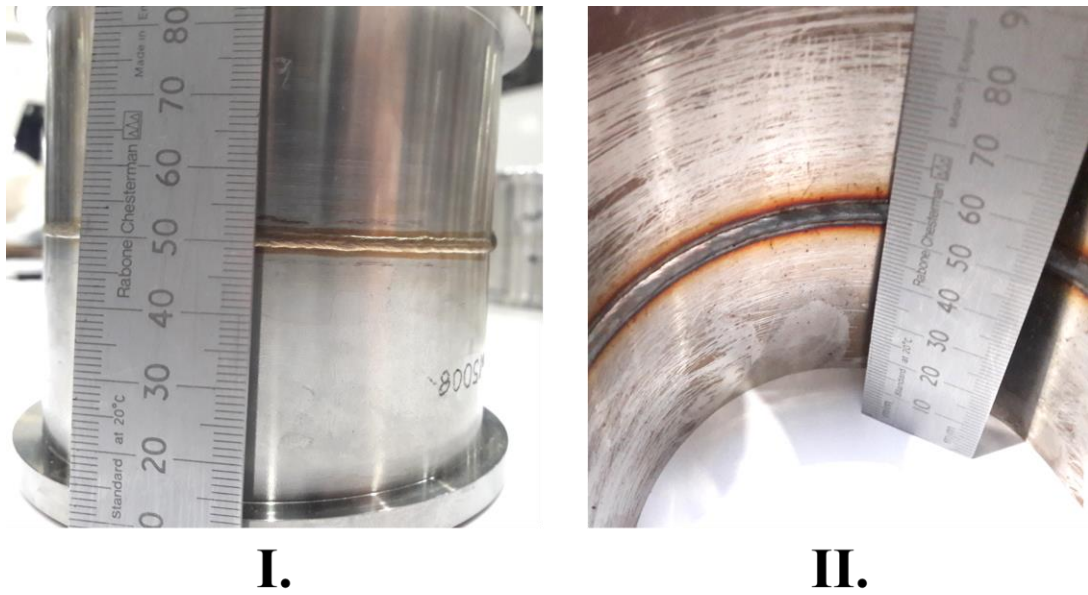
External (I.) and internal (II.) surfaces of a welded 316L pipe.
